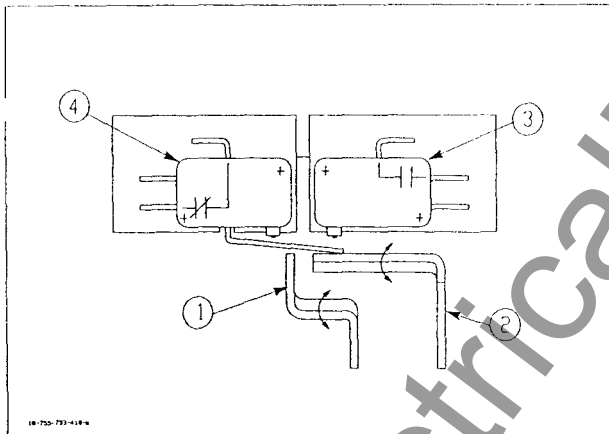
Position 2. Springs charging; motor not yet cutoff.
